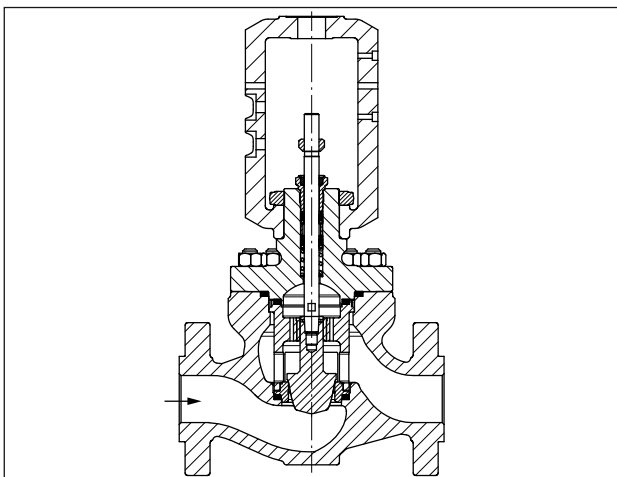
Type 251GR Globe Valve with clamped-in seat
